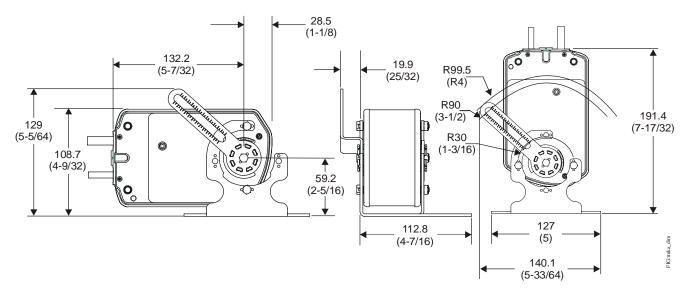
M9208-100 Remote Mounting Kit Overall Dimensions, mm (in.)
